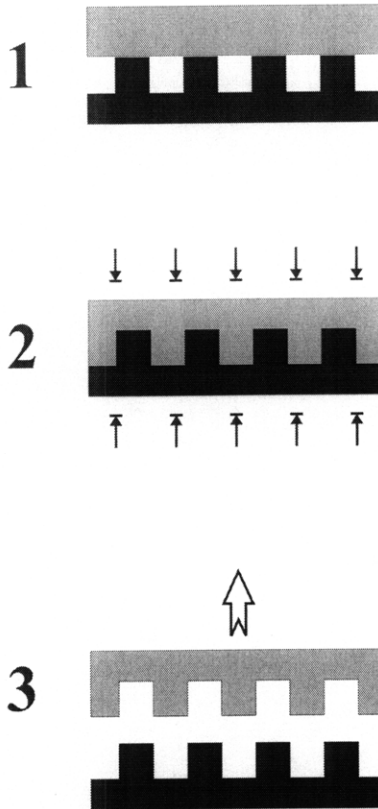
Processing steps for hot micro-embossing. The polymer workpiece is shown in gray, while the micromachined tool is black [26]
